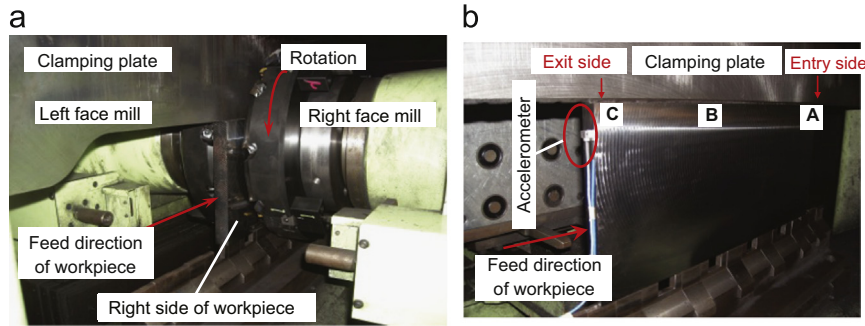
(a) Double-sided milling machine and process and (b) Work-piece machined by double-sided milling.
